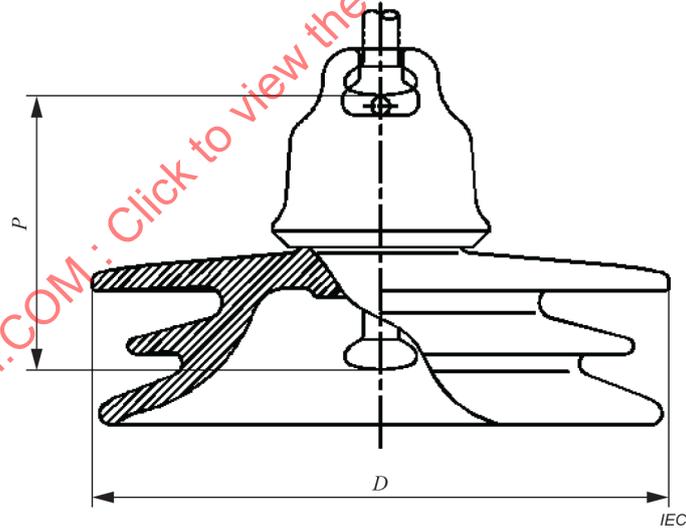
String insulator unit of three-alternating profile with ball and socket coupling
